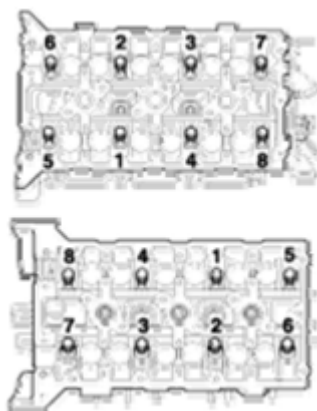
Identifying Cylinder Head Bolt Tightening Sequence
